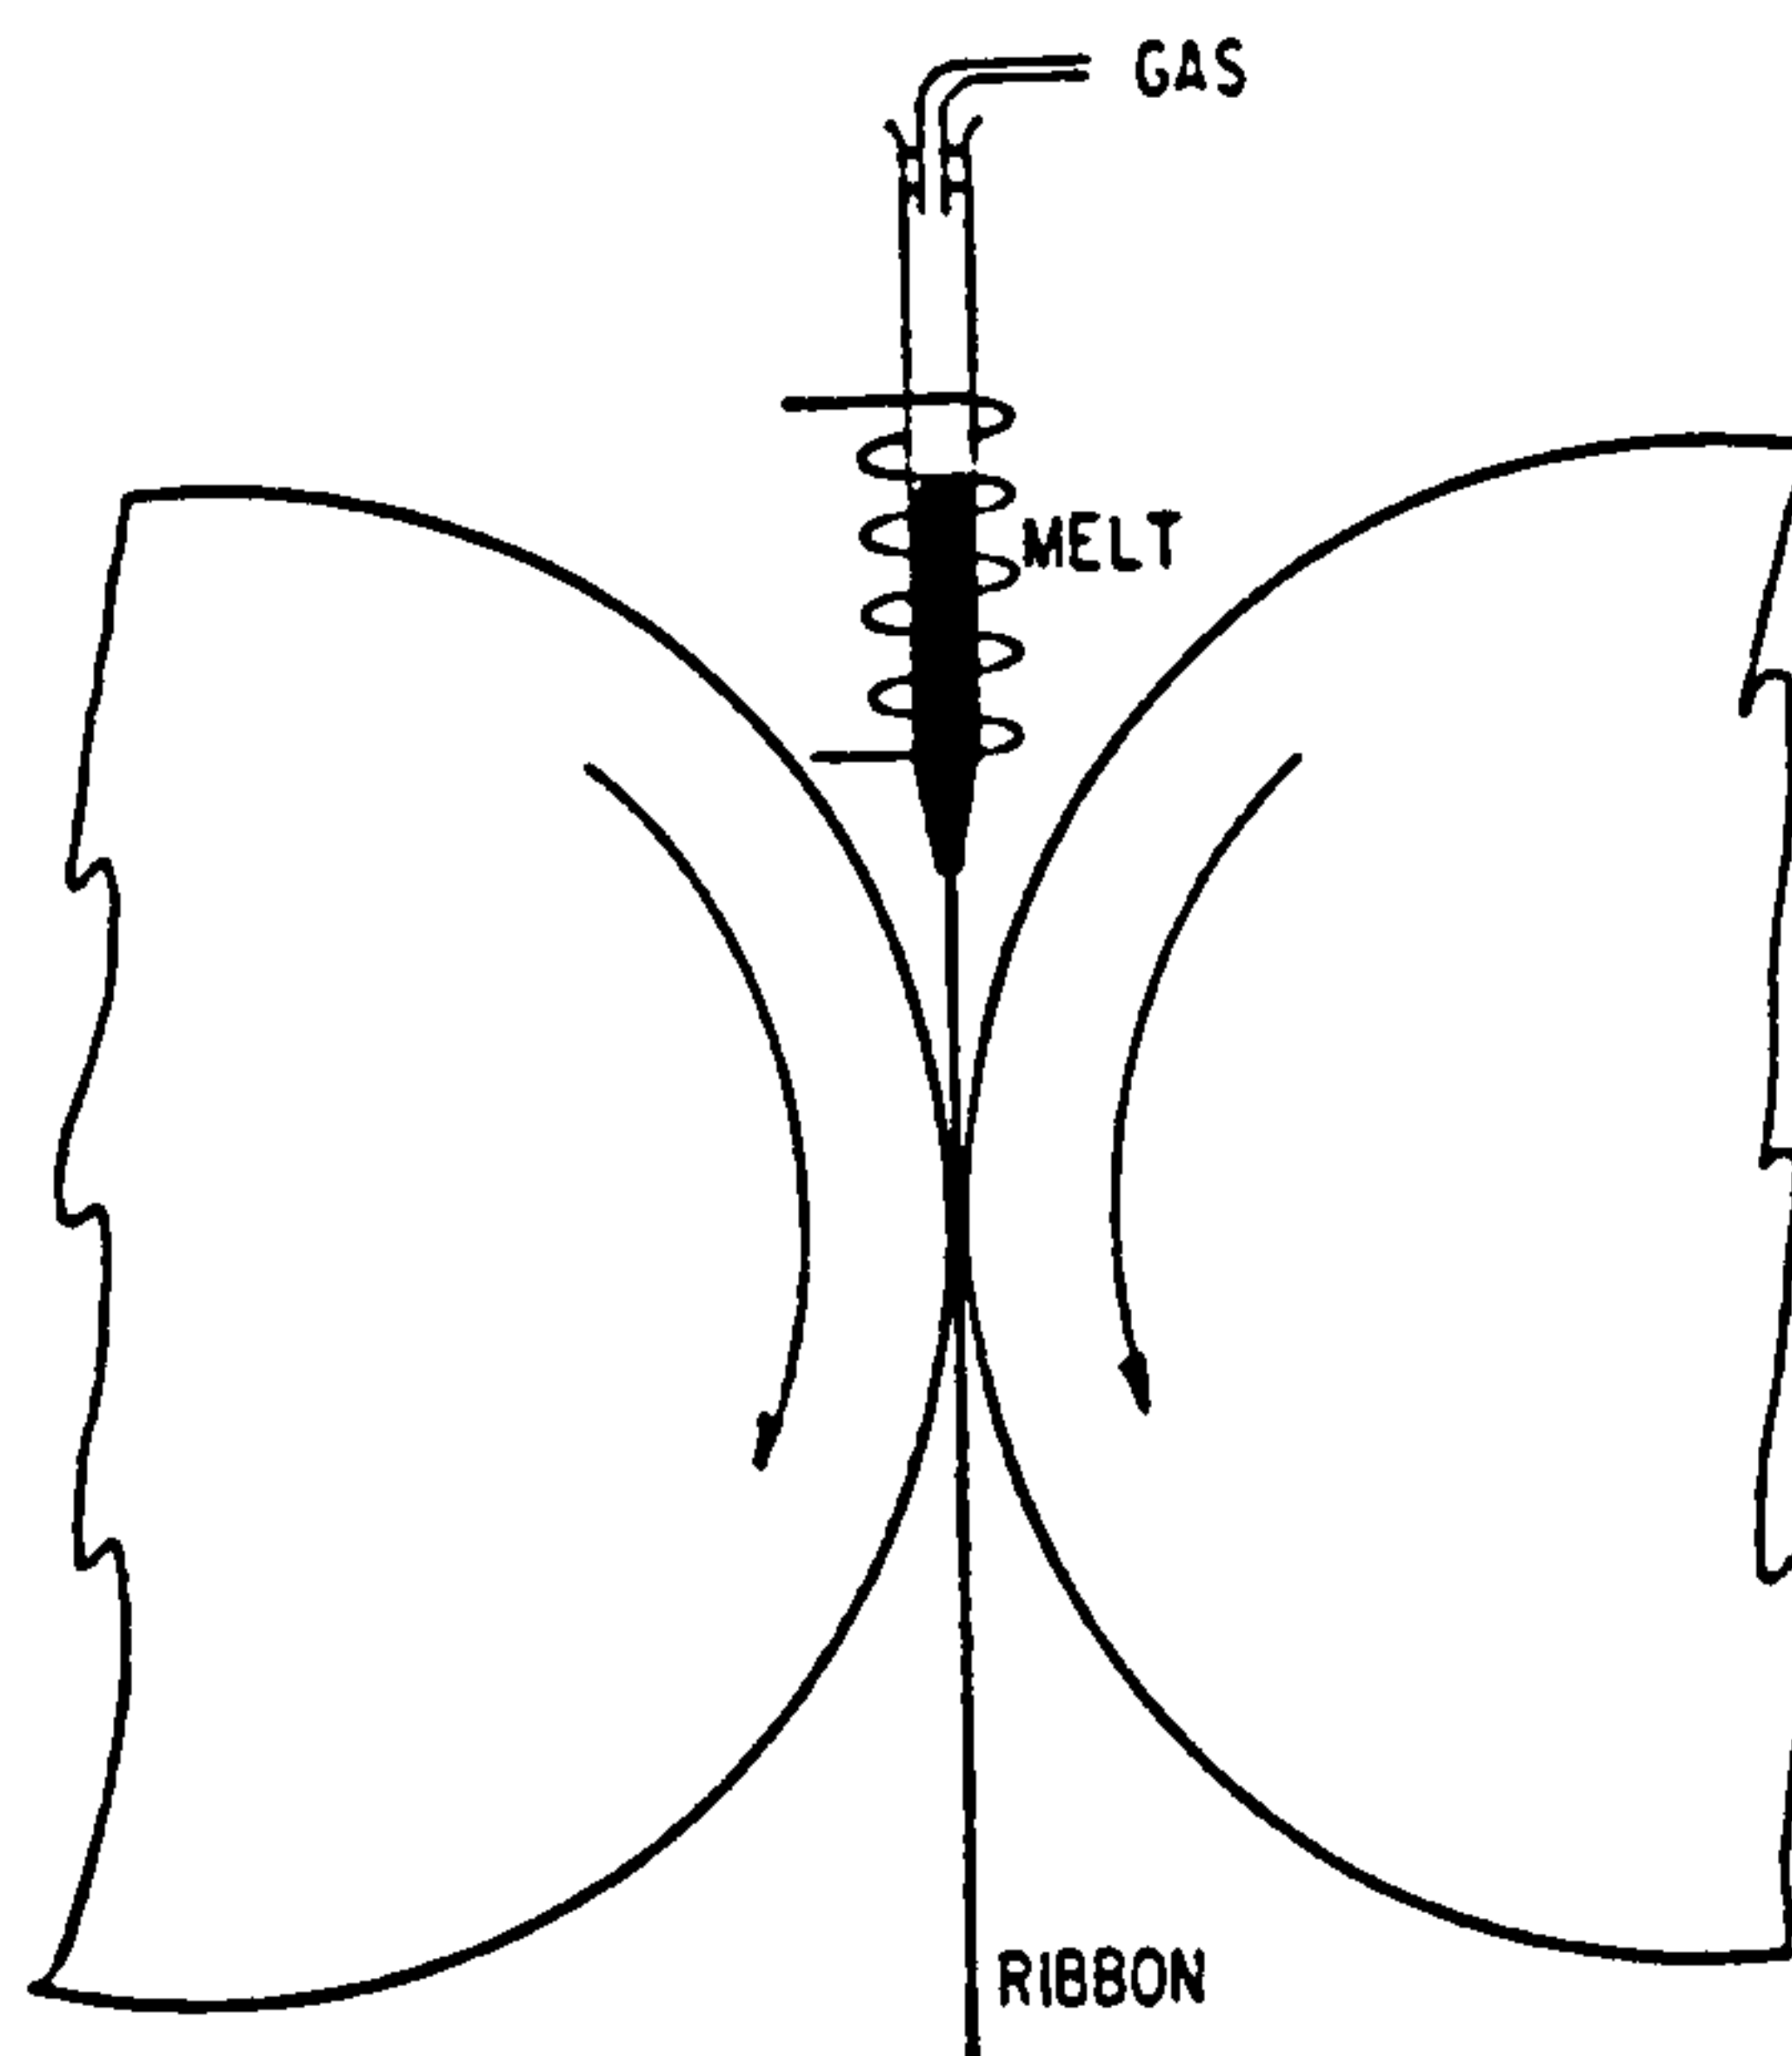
Double roller casting of ribbons, due to Babic [64].
